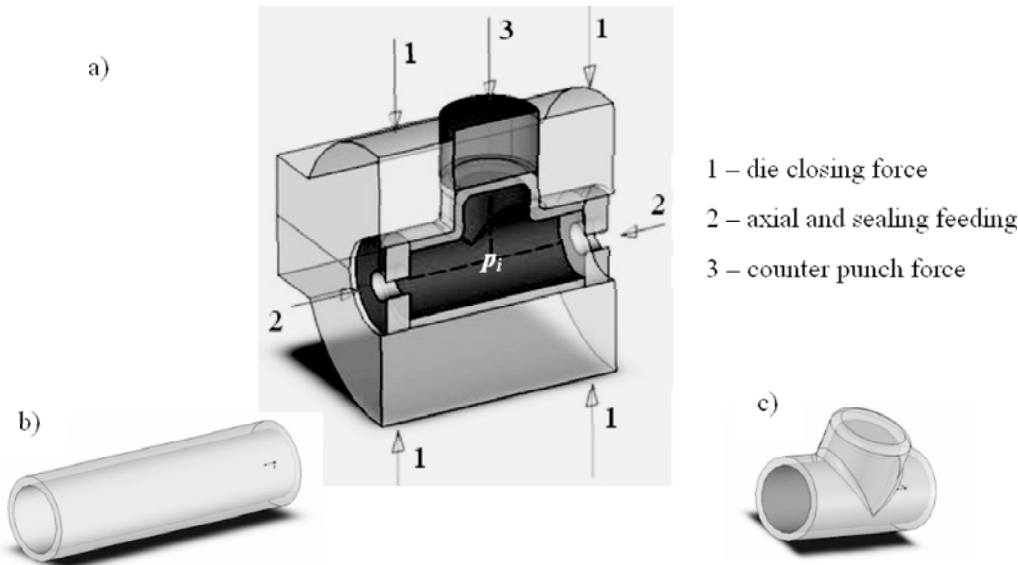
The hydroforming principles: a – tool setup, b – initial tube, c – final product (T-joint) [22]
